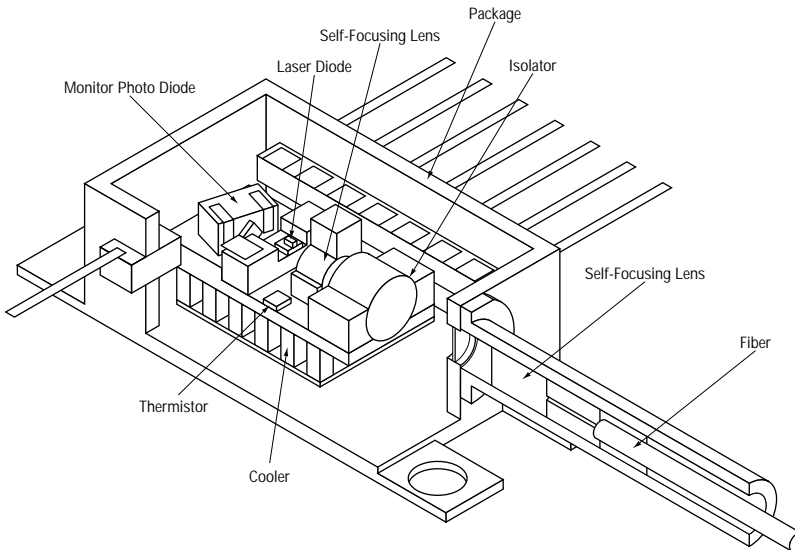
OKI Laser Diode Package Cutaway View, Showing Thermo-Electric Cooling
